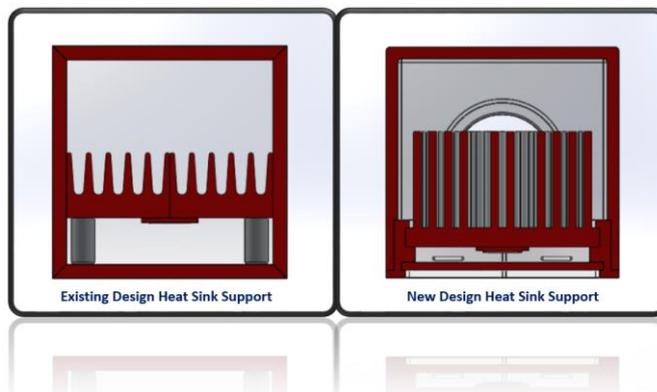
Lighting module housing design of prototype I and prototype II.
